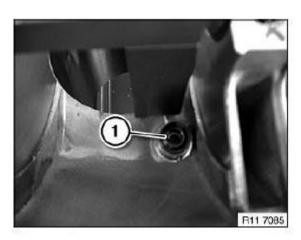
Identifying Special Tool (11 8 510) On Main Bearing Courtesy of BMW OF NORTH AMERICA, INC.
